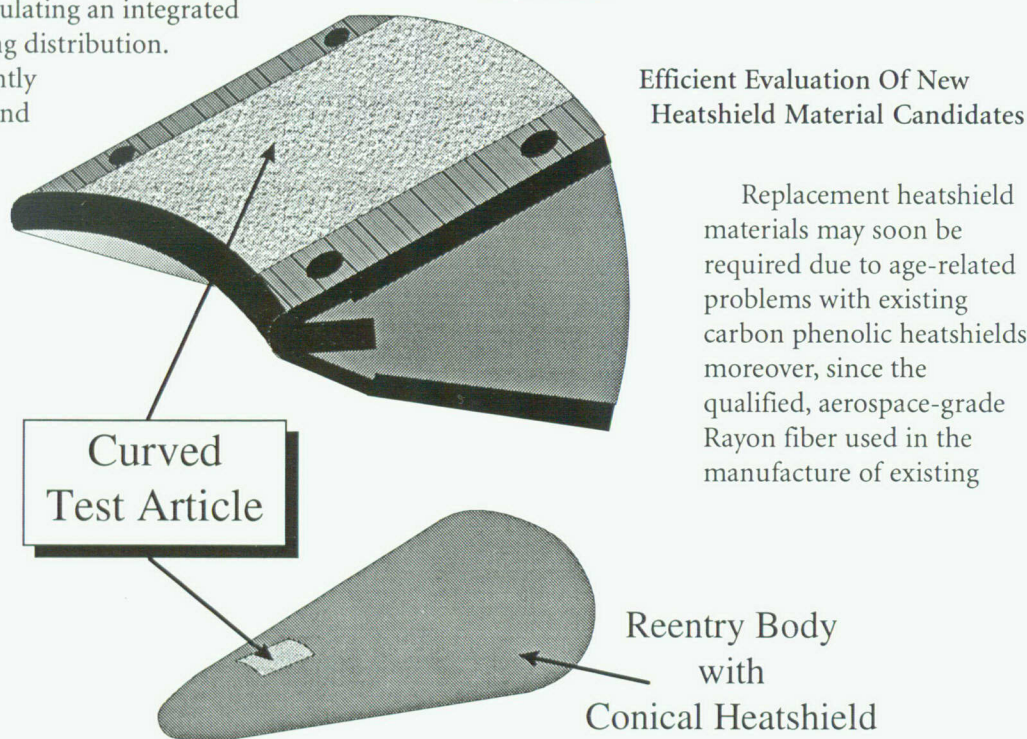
Curved-Holder for Testing Conical Heatshield Sections
